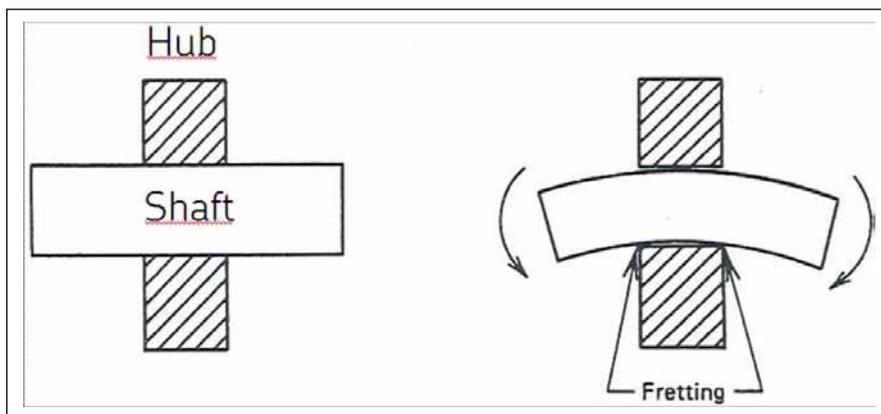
Straight shaft seat critical fretting points (Ref. 14).
